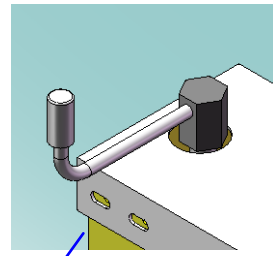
Adjusting the machine to adapt the new box and unpack the box, to satisfy the production need.
